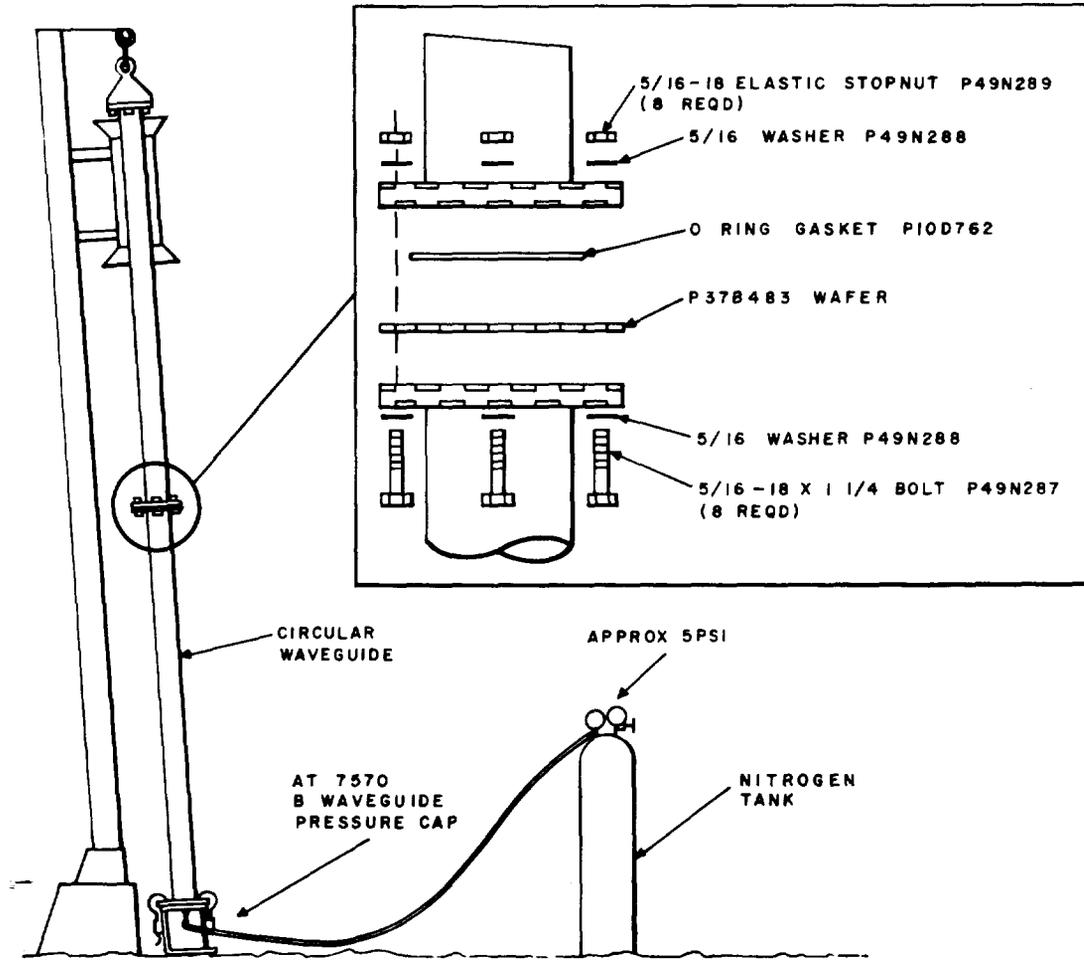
Joining Circular Waveguide Sections—Forged Flanges
